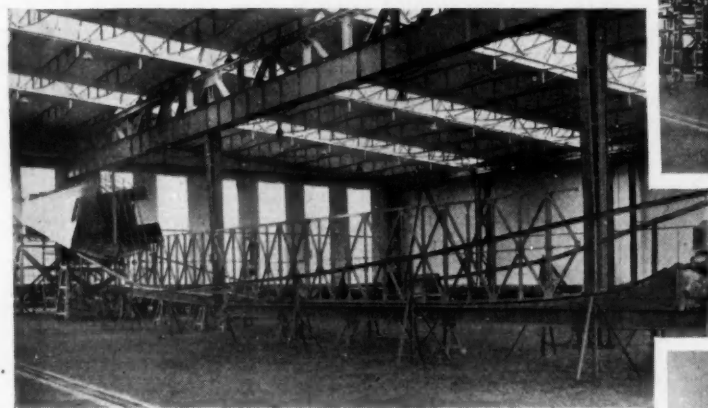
AN EARLY STAGE OF HULL ASSEMBLY
